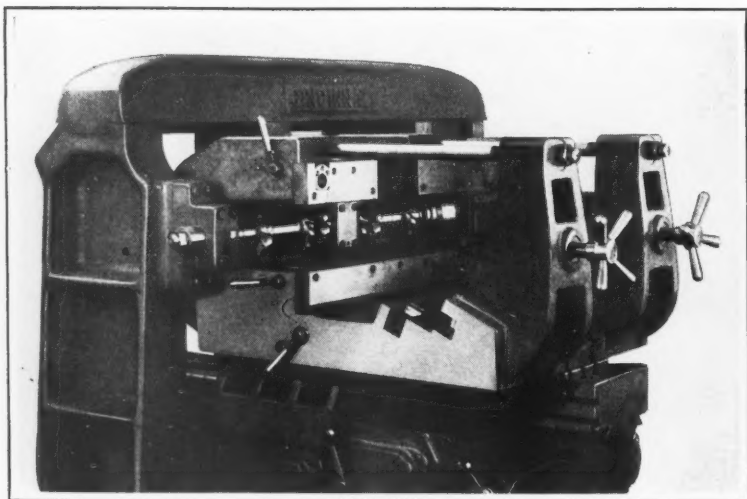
Equipment Employed for Straddle-milling Ends of Main Bearings of Cylinder Block
